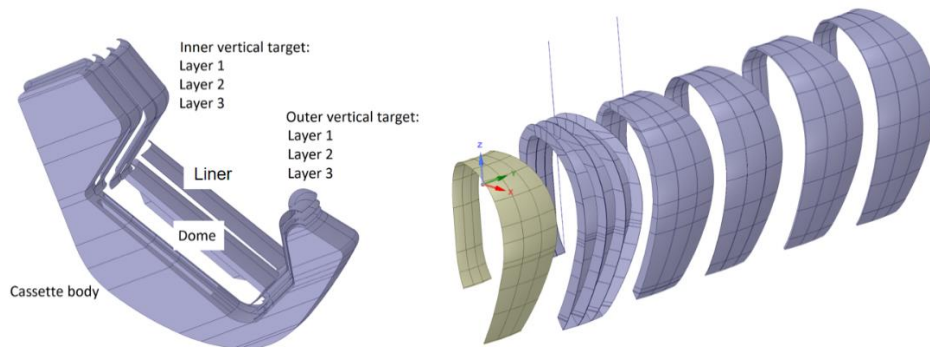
Exploded views of divertor (left) and blanket (right) after the breakdown into sub-components.
